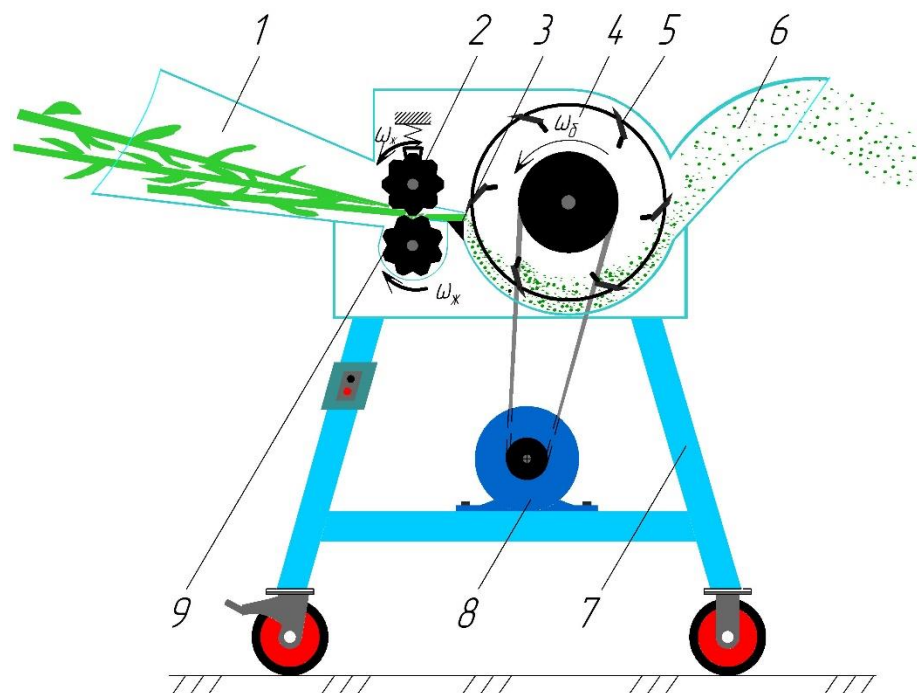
Green stalk chopper machine 1-hopper; 2-top roller; 3- counter-cutting plate; 4-cutting drum; 5-cutting knife; 6-deflector; 7-frame; 8- electric motor; 9-bottom roller.
